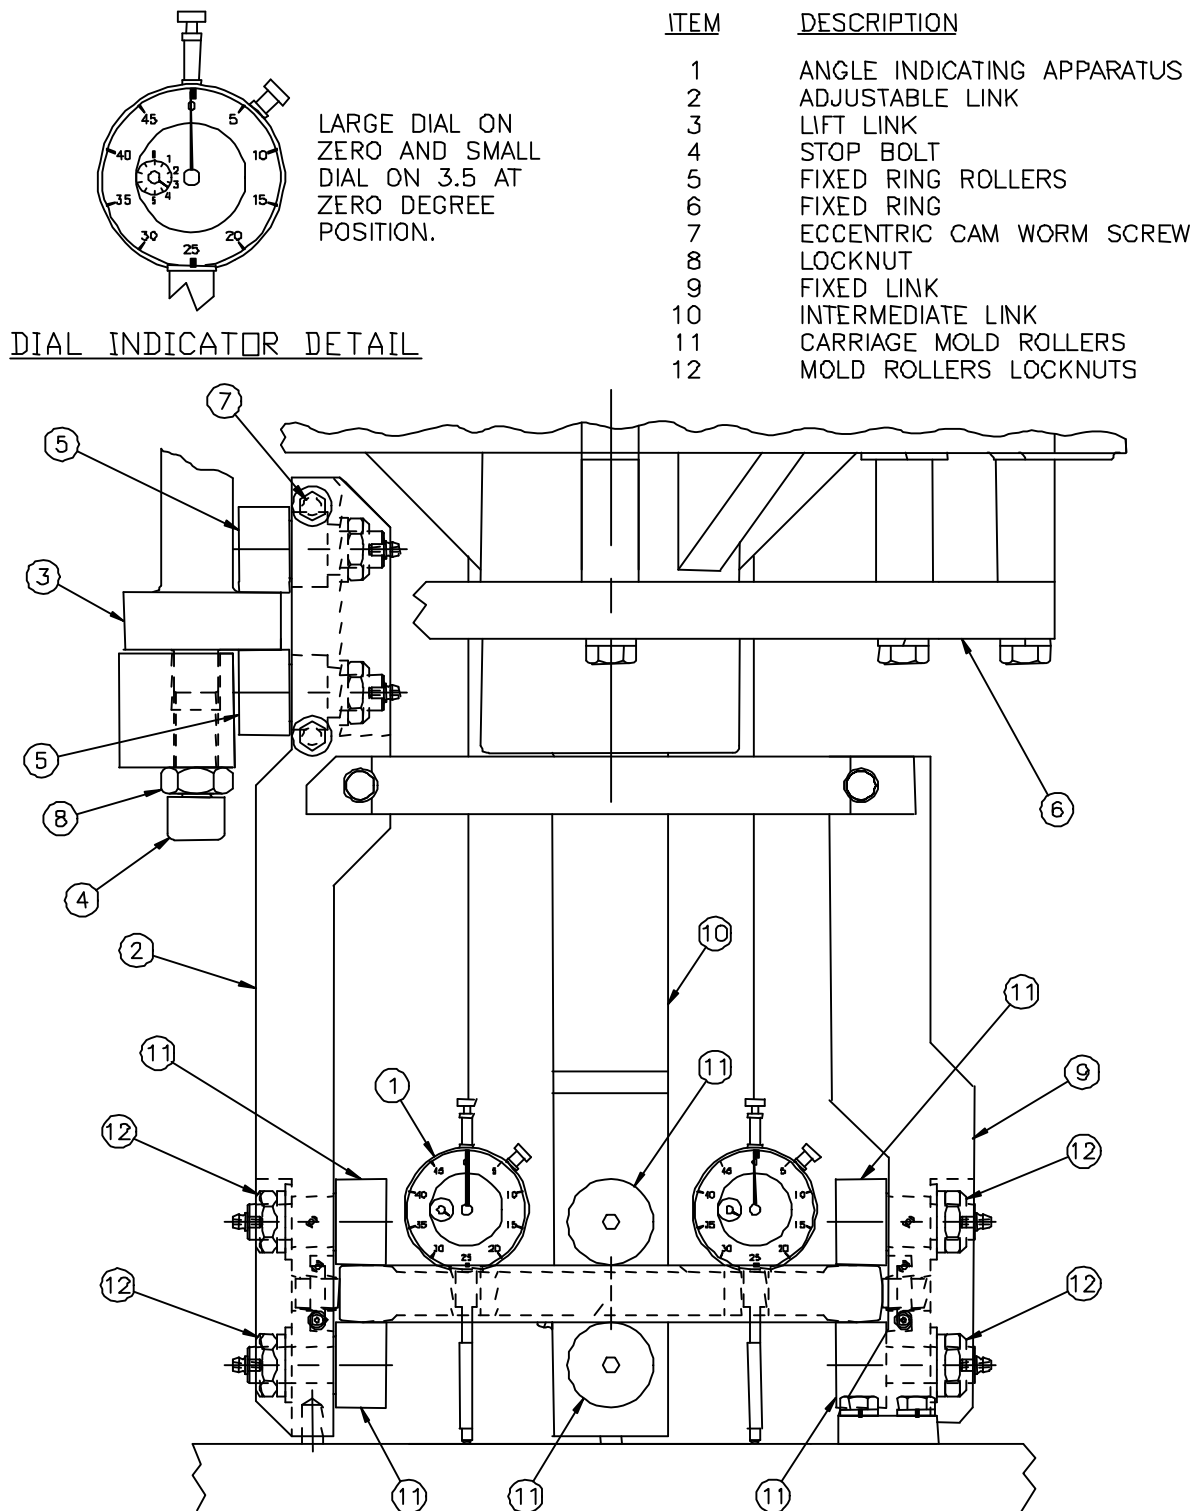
CUTAWAY VIEW OF ANGLE INDICATING APPARATUS IN MOLD CARRIAGE
